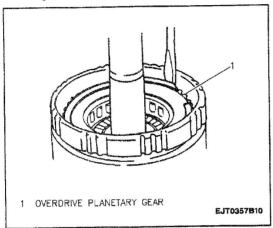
Removing Overdrive Planetary Gear Snap Ring
